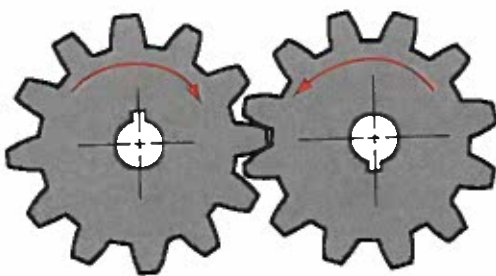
On a gear train, as one gear moves, its torque is transmitted to another gear.
